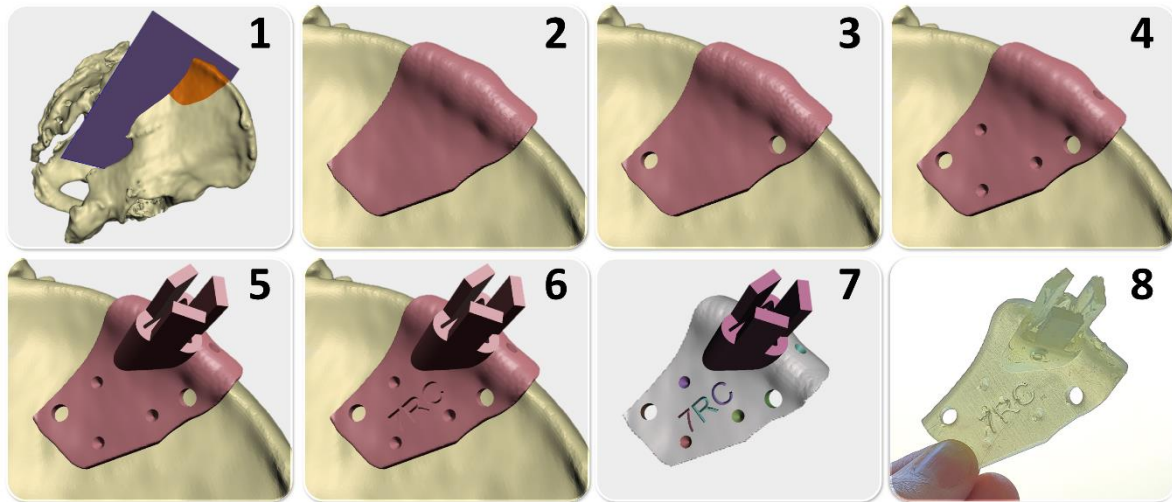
Steps for PSI design: (1) plane definition and area selection; (2) extrusion; (3) screwing holes; (4) creation of conical indentations; (5) addition of the socket; (6) inscription of the identifier; (7) final design; and (8) 3D printing.
